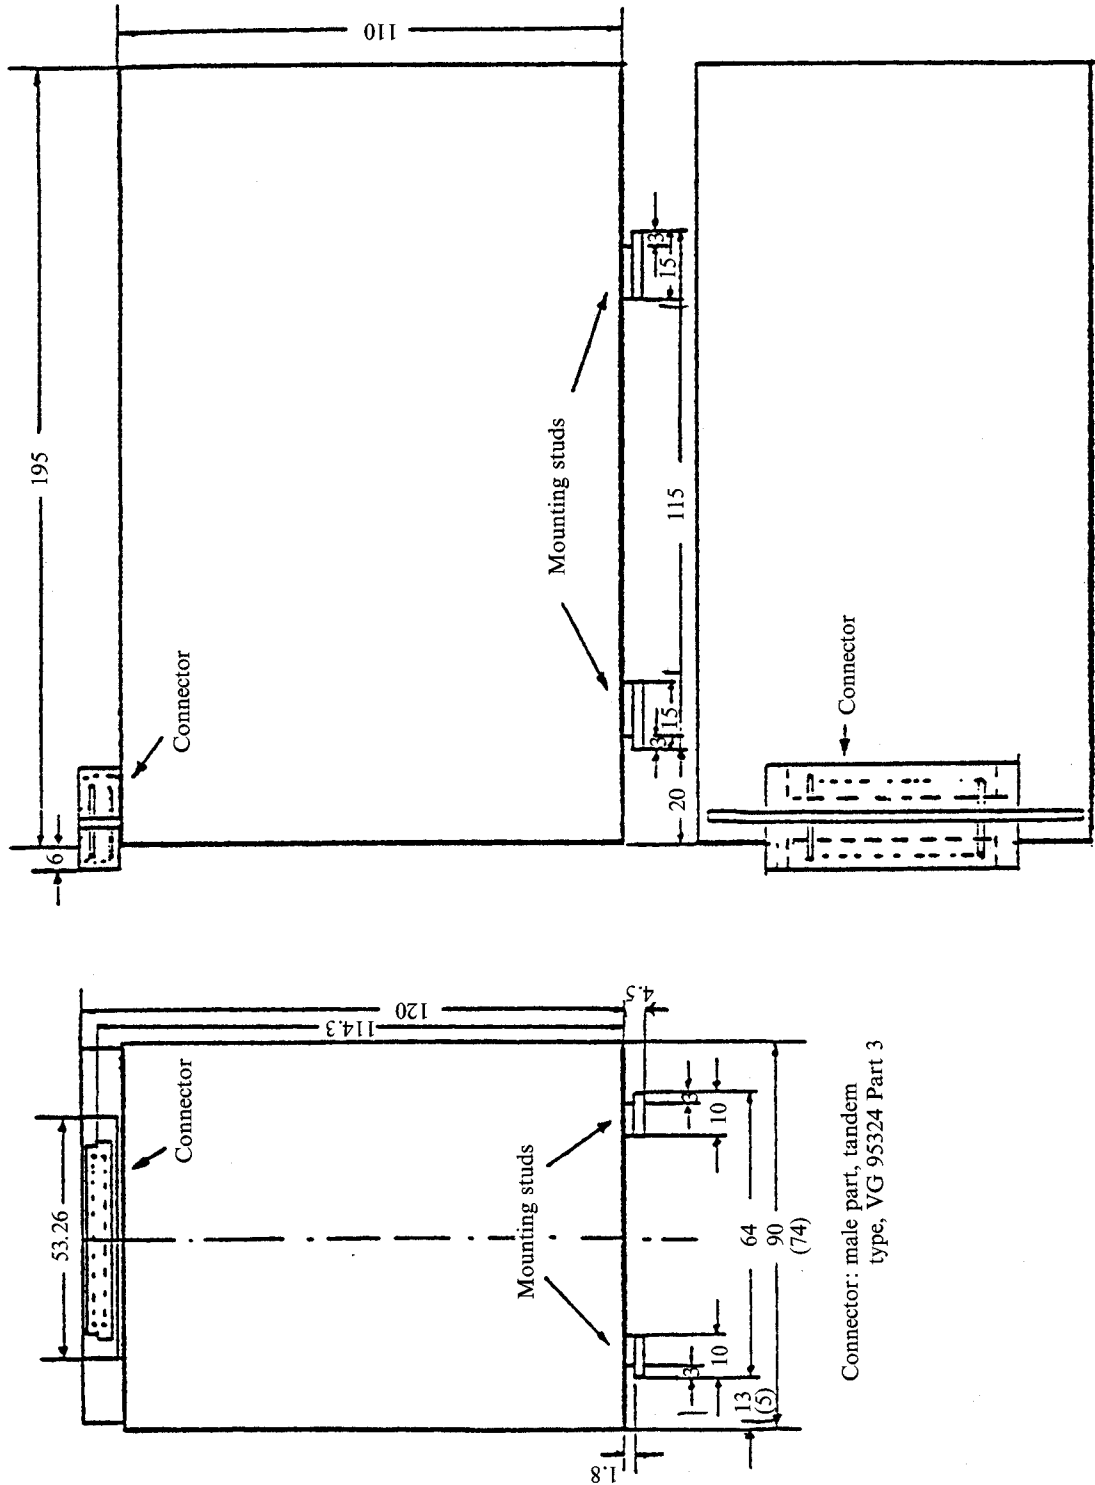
Overall dimensions of the cabinet used for housing the built-in DCE, and positioning of the connector.
